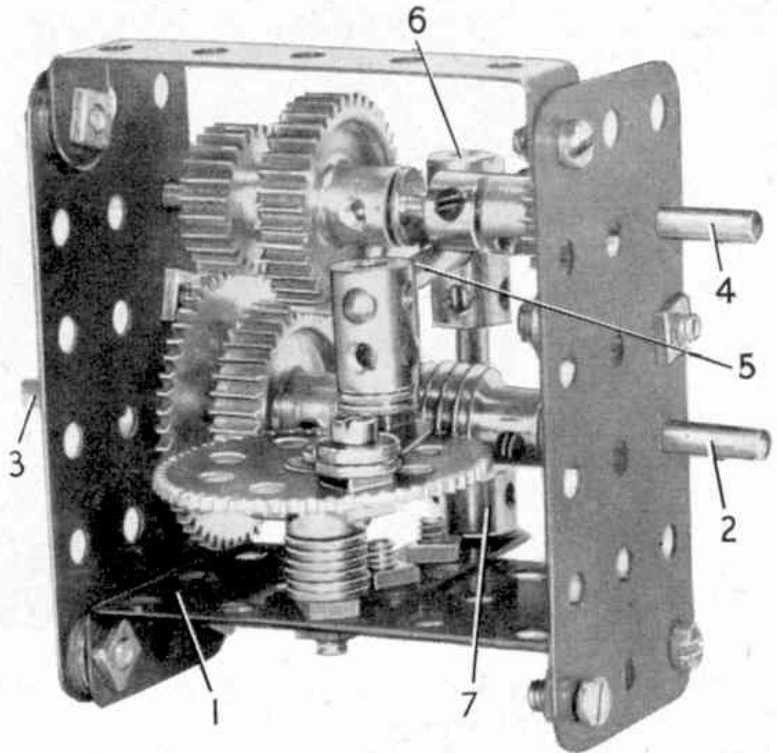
The Compact Automatic Reversing Mechanism described on this page. It was designed by L. J. Pattison, Sheerness.
